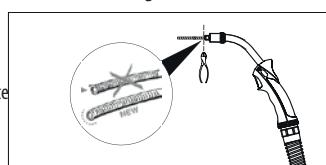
Cutting off the Liner Stick Out and Reassembling the Torch
